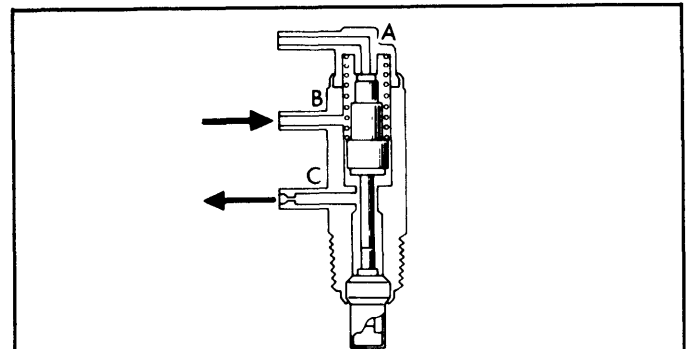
Testing Thermostatic Vacuum Switching Valve
